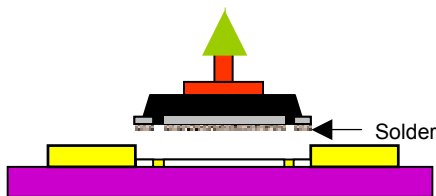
Vacuum cup retrieves LFCSP from Stencil without disturbing solder paste
